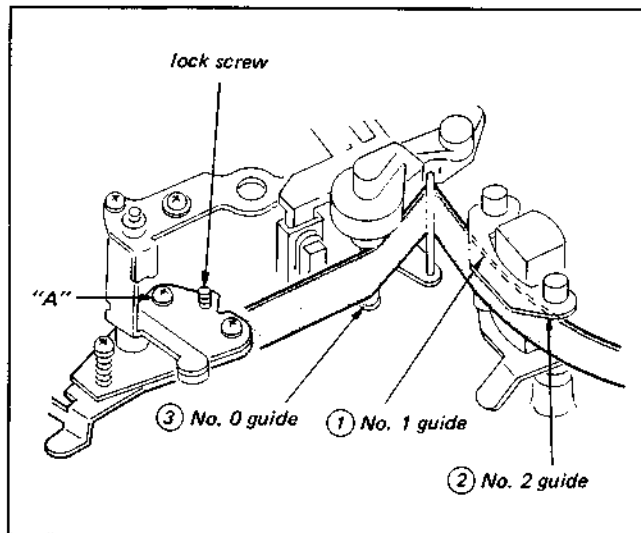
Replacement and adjustment (2) of tension regulator arm plate assembly
